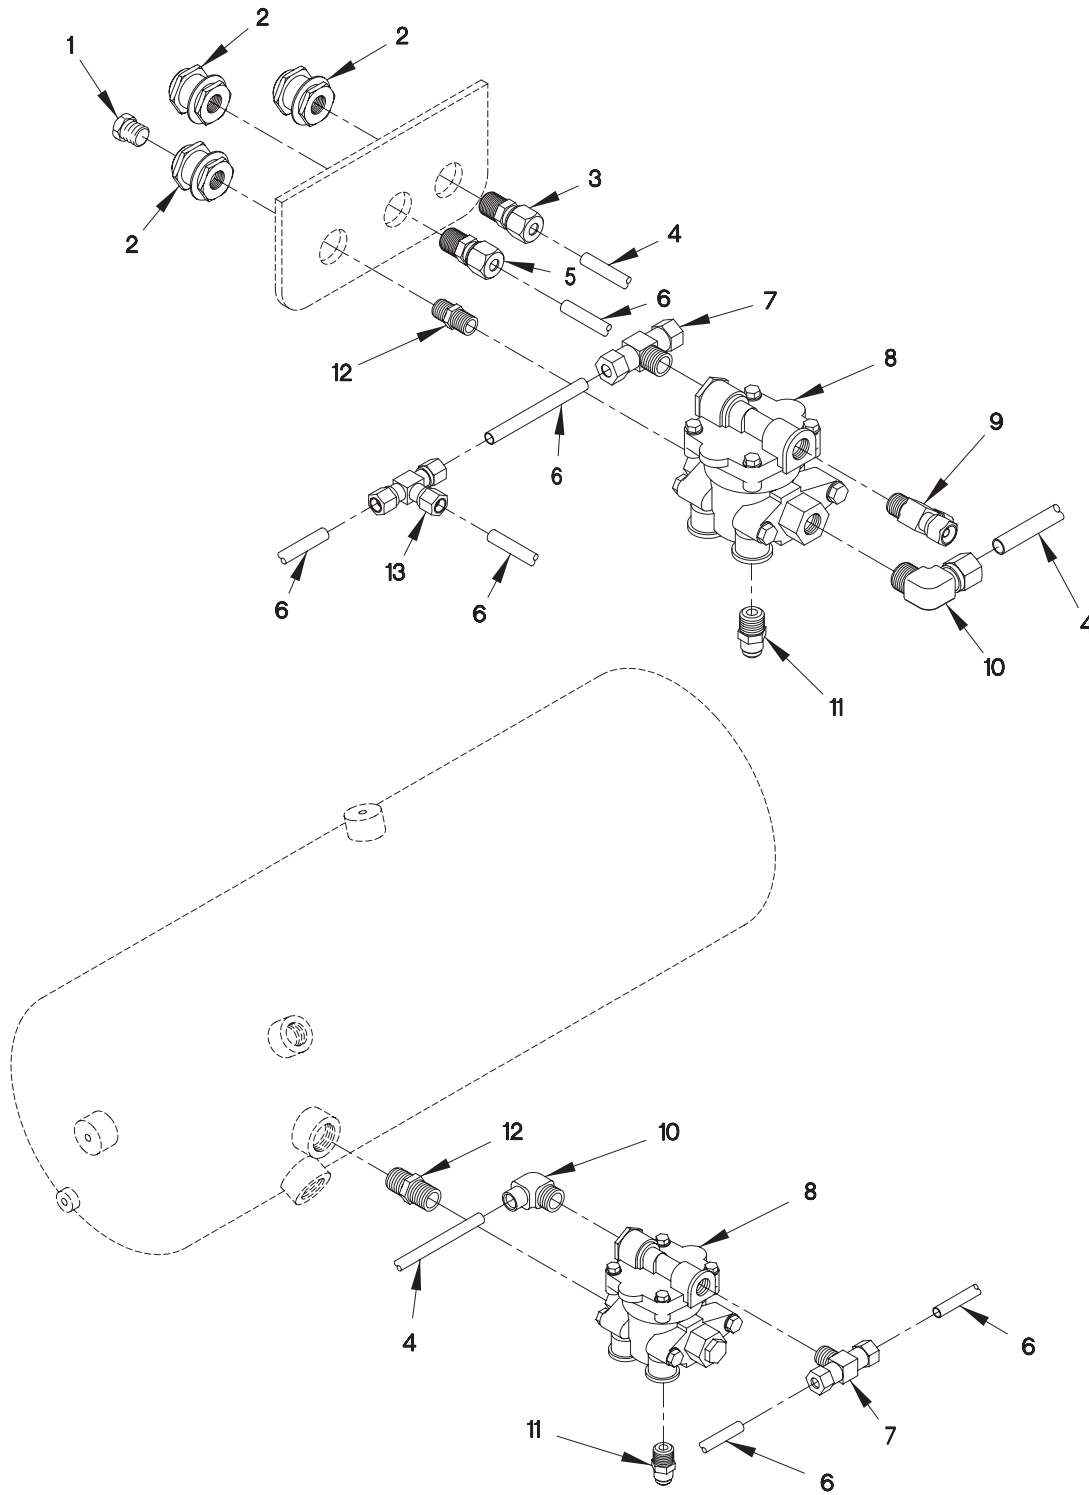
Group 1208 AIR SPRING, PRESSURE-RELIEF VALVE, TUBES & FITTINGS.
